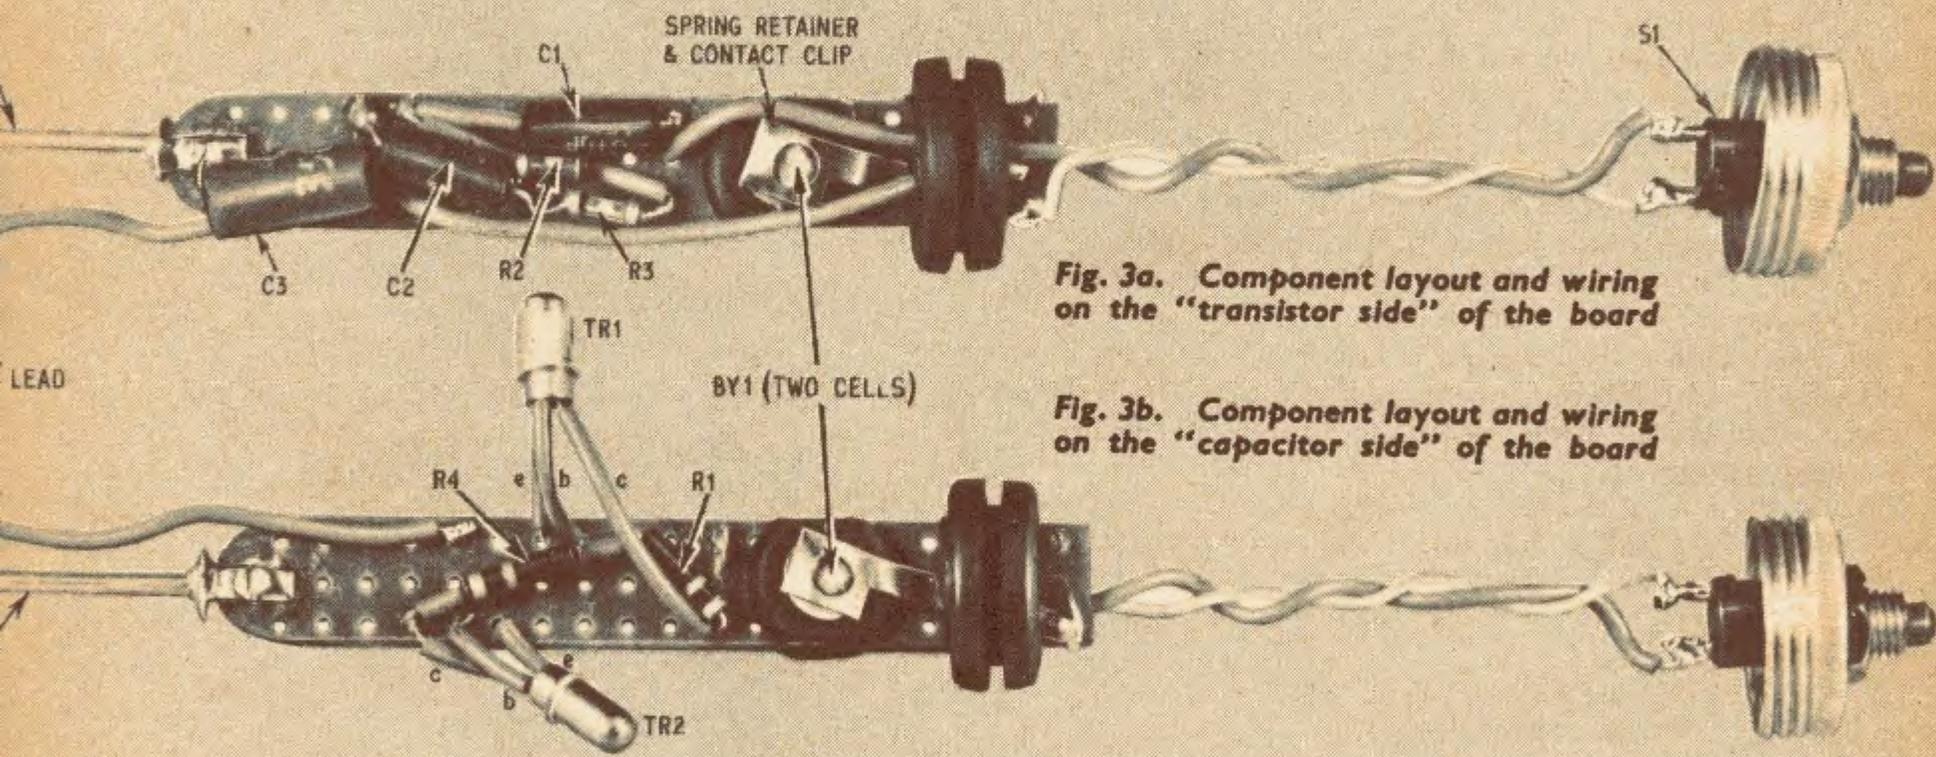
Component layout and wiring on the "transistor side" of the board
